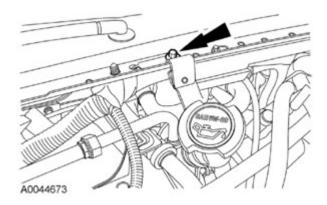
Locating Oil Fill Tube Support Bracket Bolt Courtesy of FORD MOTOR CO.
